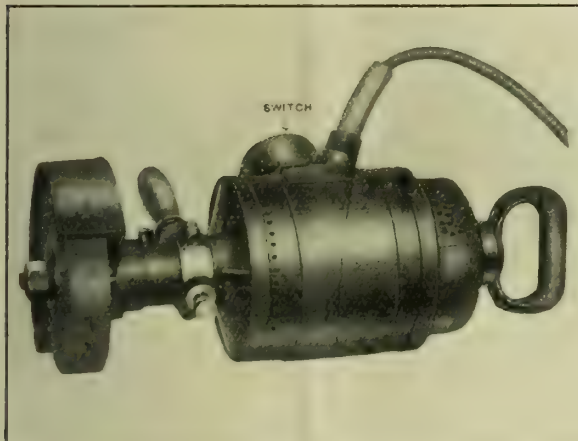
A PORTABLE ELECTRIC GRINDER. (The Consolidated Pneumatic Tool Company.)
